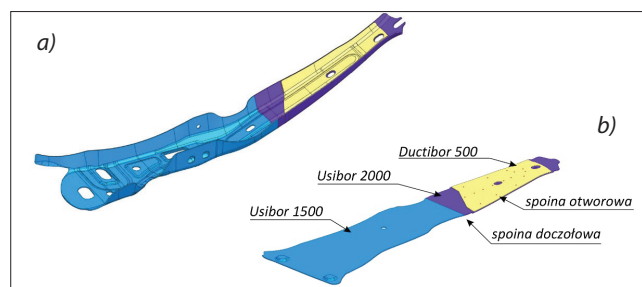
Drawpieces for intended use: a) finished product (after trimming), b) welded form
